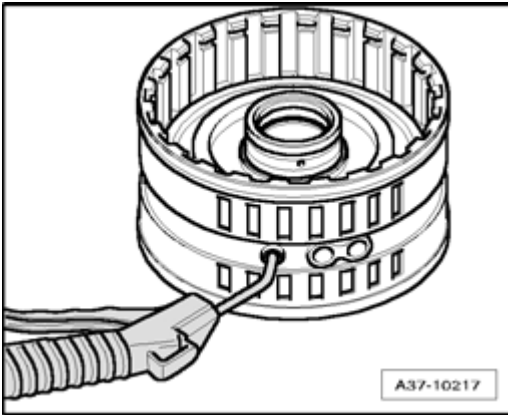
Pressing Piston "E" Out Of Cylinder "E" With Compressed Air
